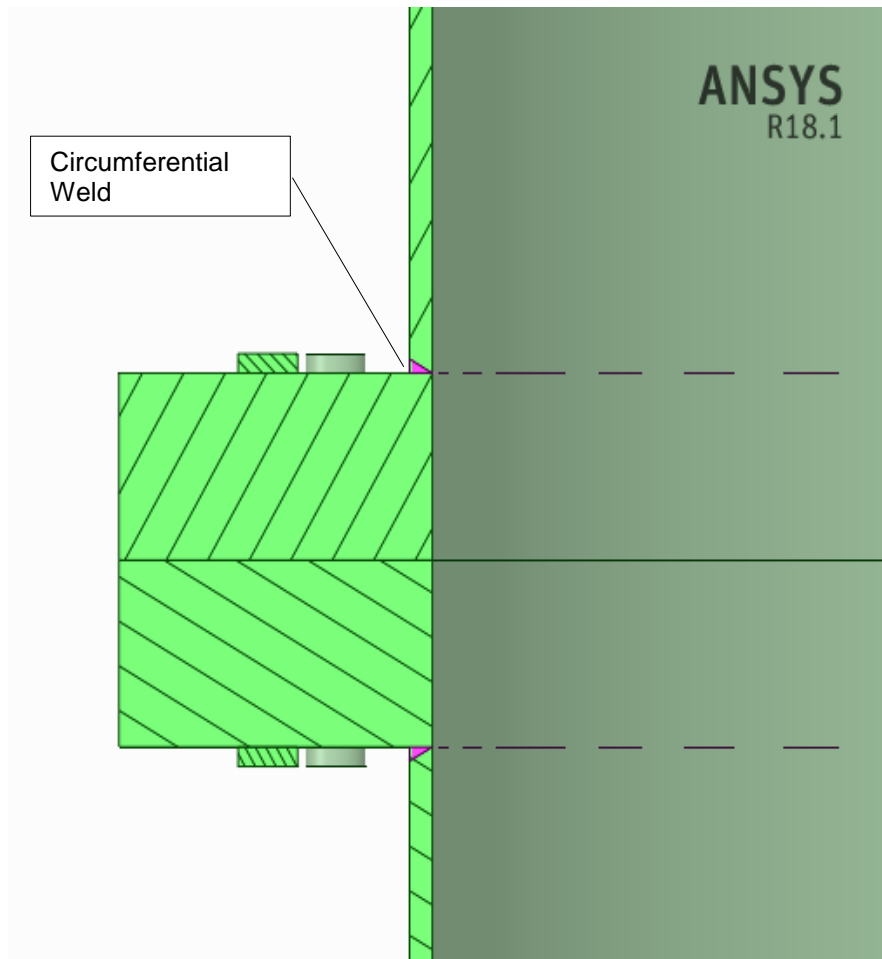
Welded Tube-to-Flange Connection
